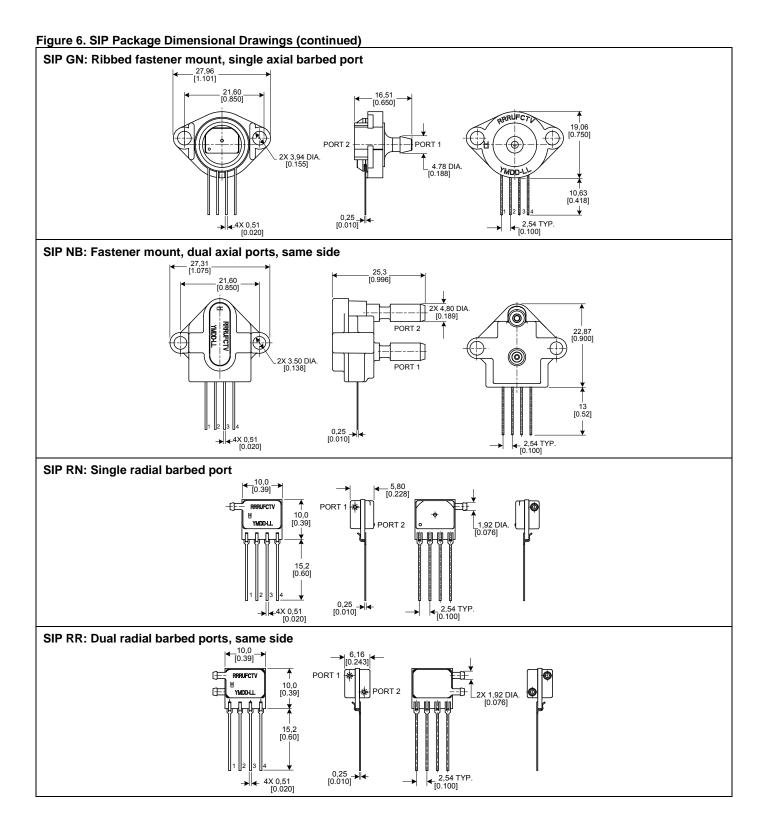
SIP Package Dimensional Drawings (For reference only: mm [in])
